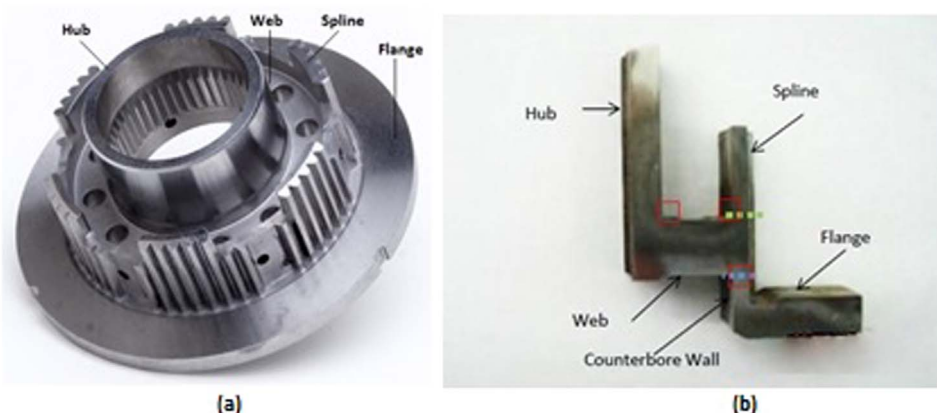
(a) geometry of a sprocket, a typical sample for TWRI inspection; (b) cross section of the sample with the high-stress regions of interest marked with squares.
